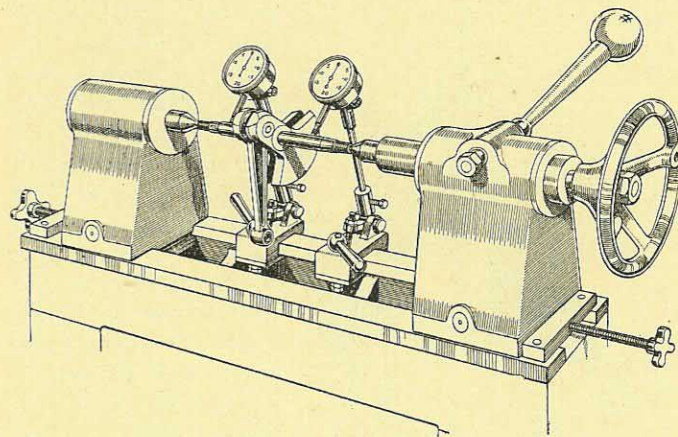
CHECKING ALIGNMENT OF DRIVING-SHAFT ASSEMBLY.
